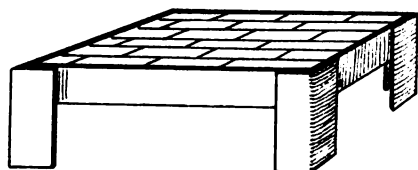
HERE THE STAND IS READY FOR A WELDING JOB
